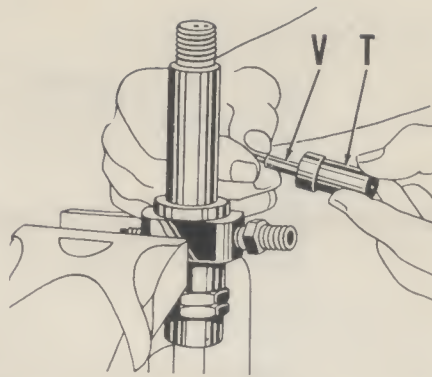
Removing Oliver Diesel engine injector nozzle tip (T) and the valve (V).
